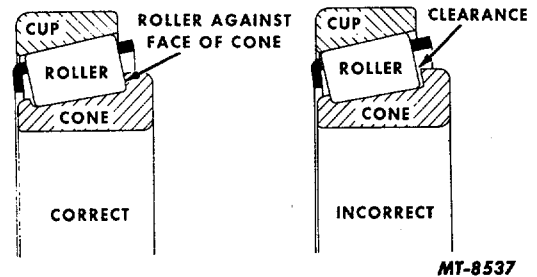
Roller Bearing When Correct Adjustment is Obtained. (The rollers of the bearing must bear against the face of the cone as shown. Rotation of the bearing during adjustment is necessary to obtain this condition.)
